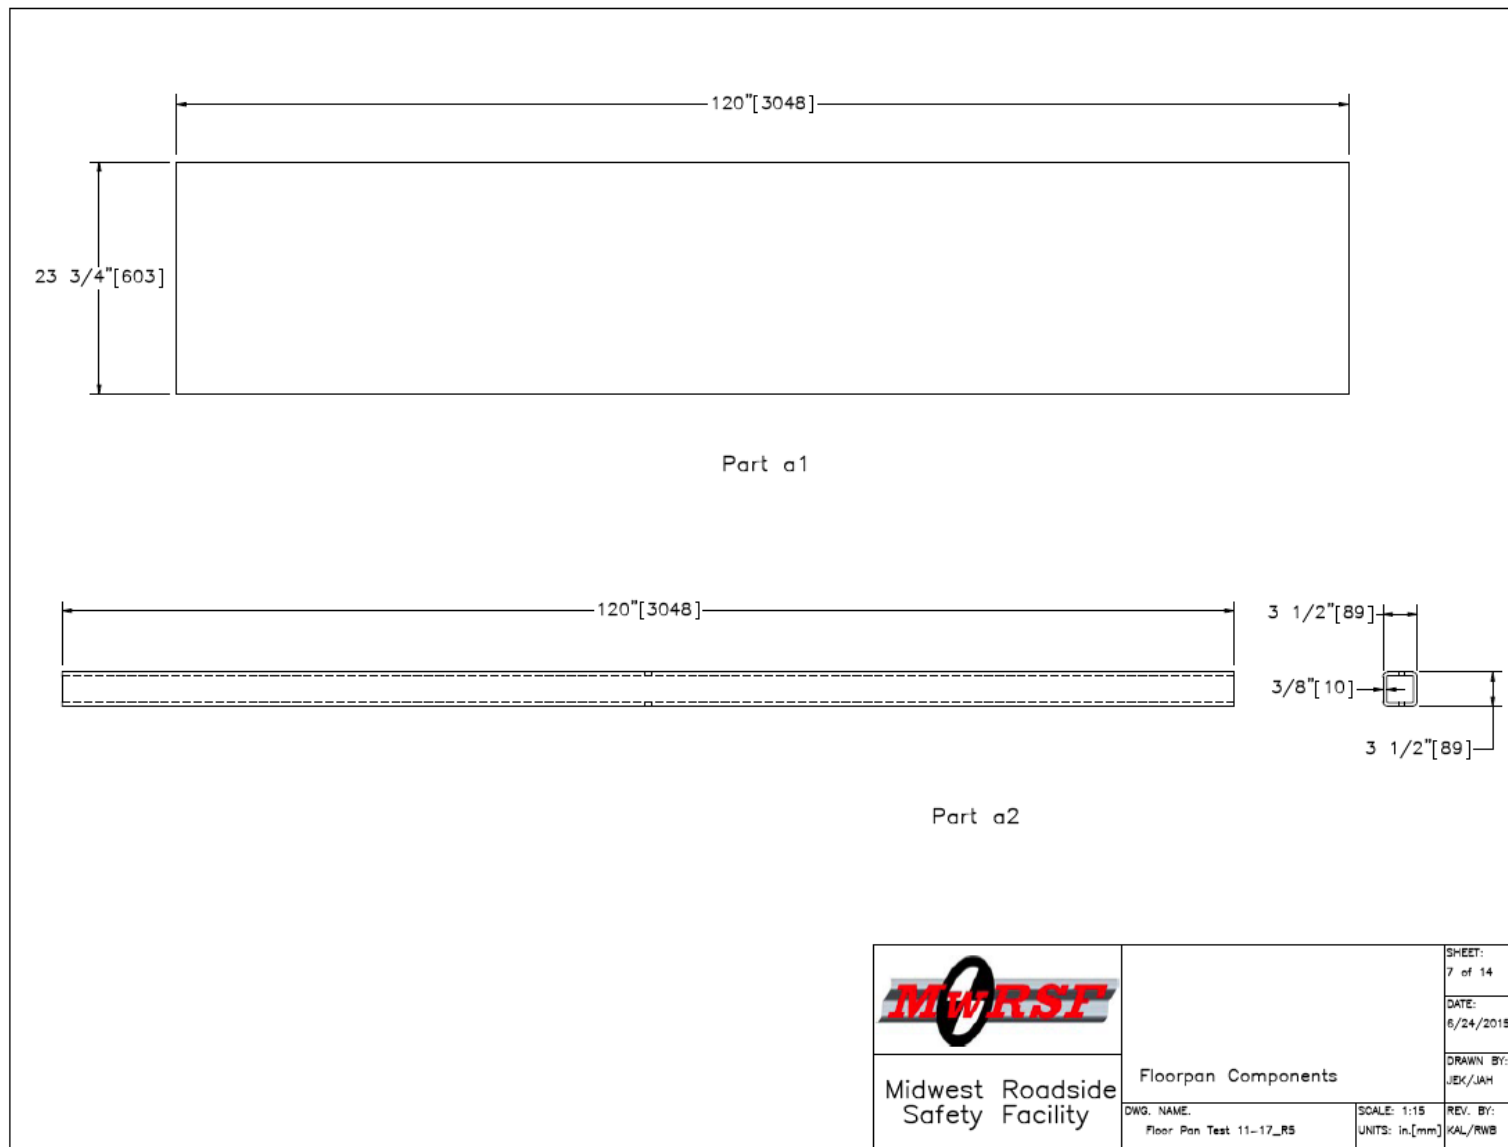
Bogie Details, Floorpan and Undercarriage Components
